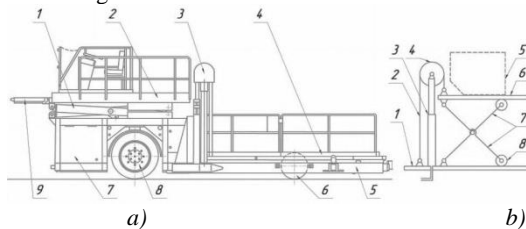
Self-propelled container loader: *a* – drawing 1 – front platform elevation gear; 2 – front platform; 3 – elevation cylinder sproket; 4 – main platform; 5 – chassis frame; 6 – support wheel; 7 – power-hydraulic plant; 8 – dirving-and-steering wheel; 9 – deck transfer interface; *b* – working body diagram; 1 - frame; 2 - chain; 3 – hydraulic cylinder of the elevating gear; 4 - chain sproket; 5 - container; 6 – main platform; 7 - scissors links; 8 – scissors links rollers.
